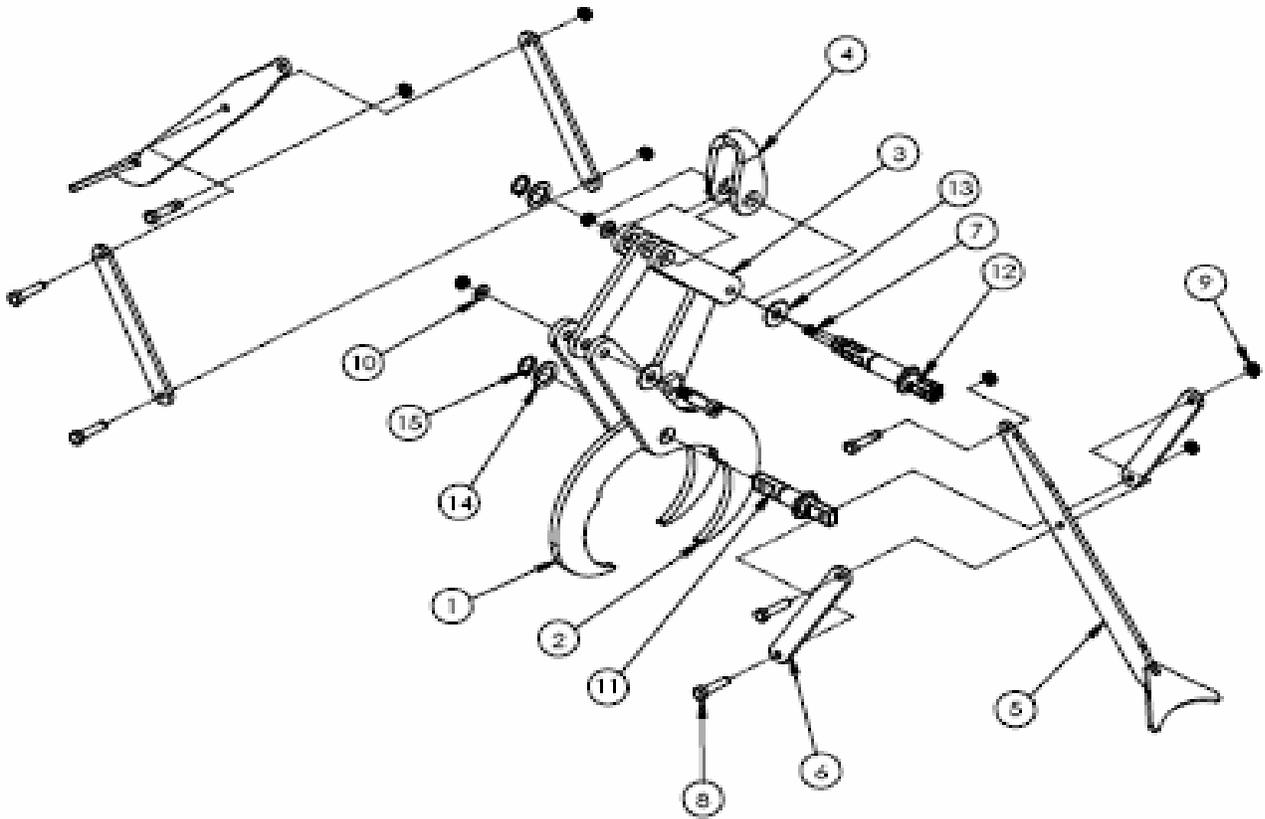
Exploded Parts View for Models PG-C-045, PG-C-060, PG-S-045, PG-S-060
